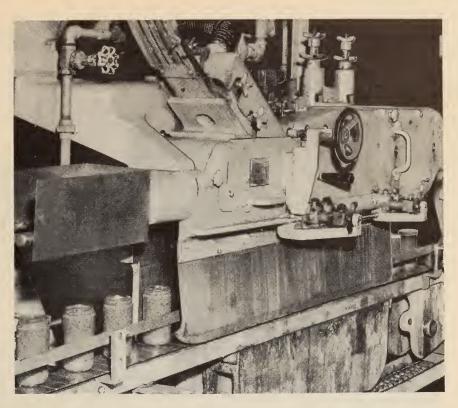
Steam-vacuum closing machine for screw-top caps for plants of large capacity.
